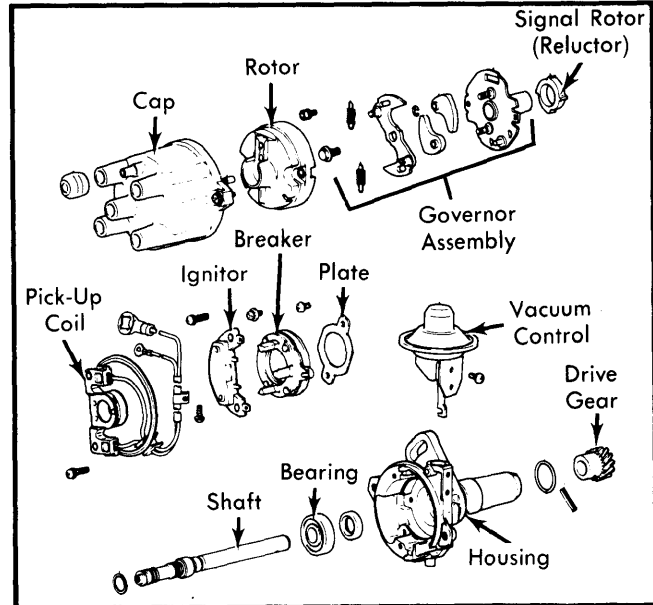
Exploded View of Chrysler Corp. Distributor (Courier 2000 cc Similar)
